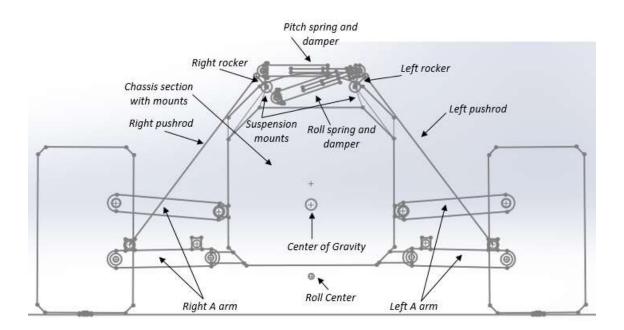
Sketch of the front view of the front suspension system with its main components
